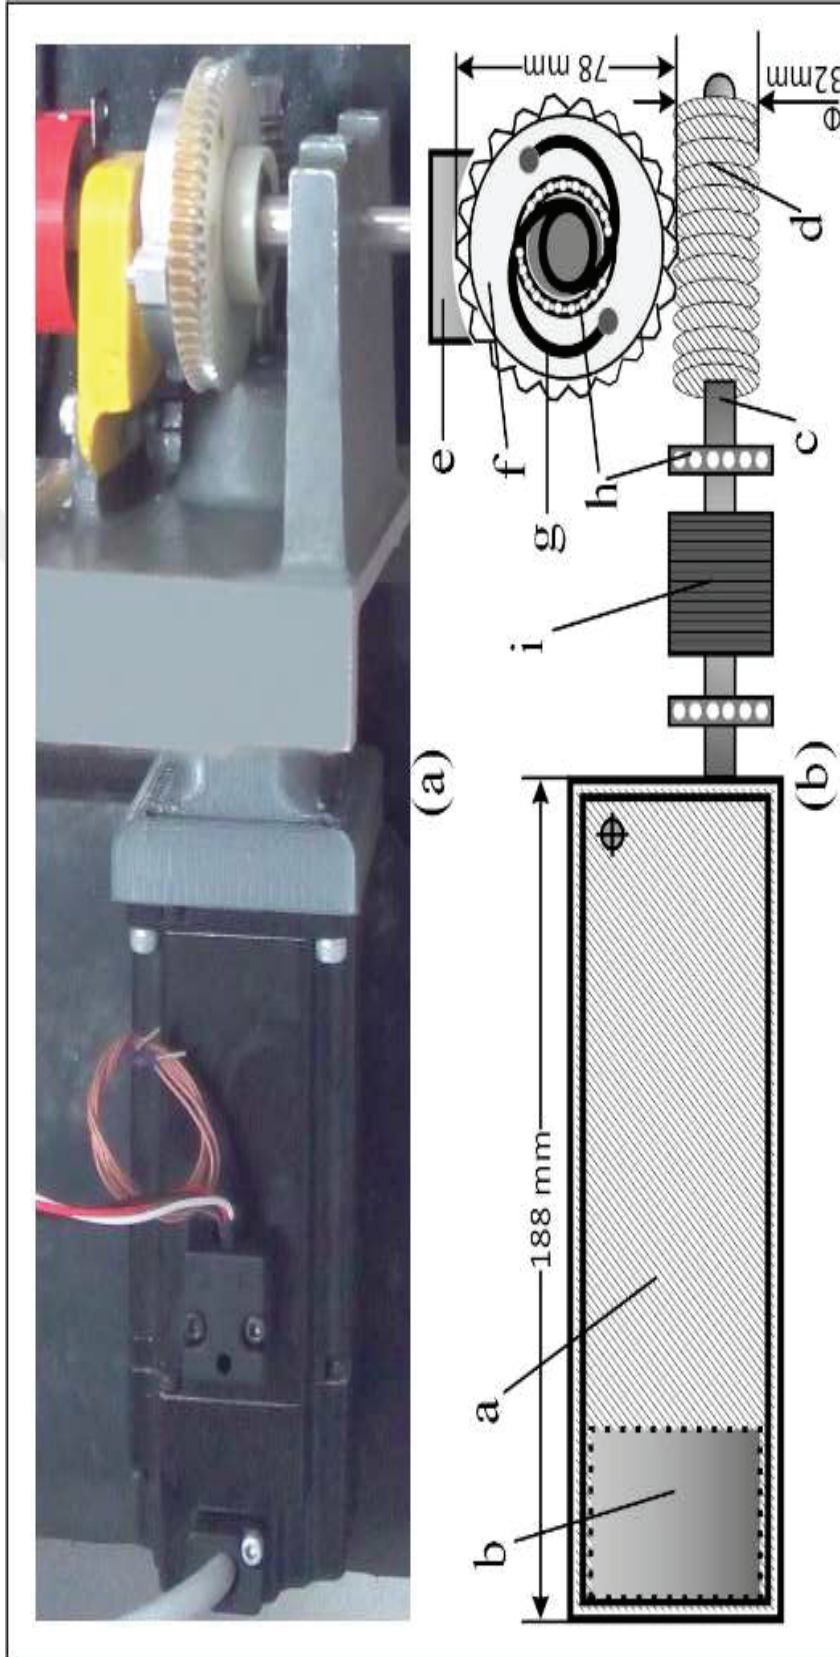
(a) Rotary SEA system and (b) cross sectional view of the actuator indicates parts including a=frameless 50mm diameter of the torque motor with a body, b=motor joint encoder, c=shaft, d=worm, e=load joint encoder with bearing, f=worm wheel, g=spring, h=ball bearing, and i=coupling
